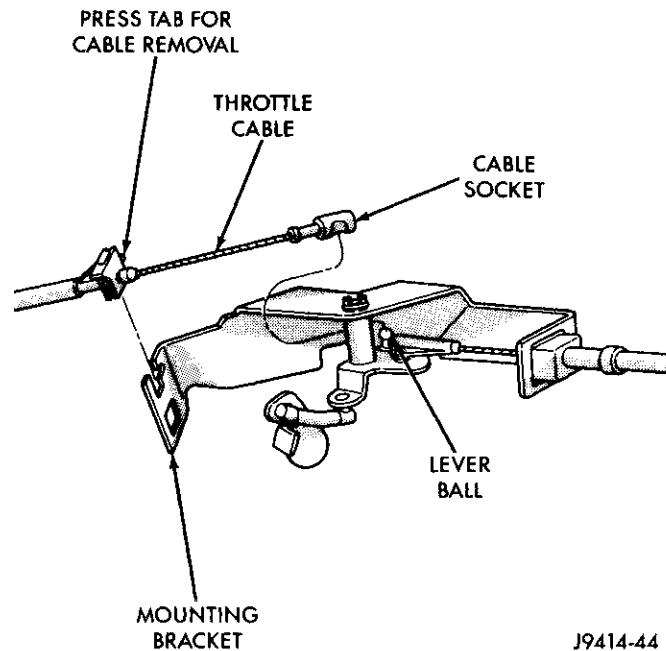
Throttle Cable at Throttle Body—8.0L V-10 Engine
